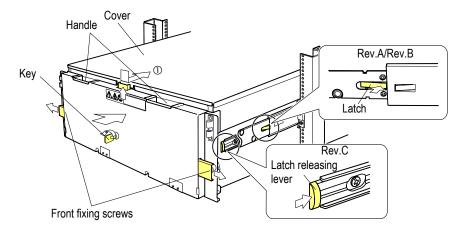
Removing Front Side of the "Chassis 3" (A Drive Box with the Last Unit ID#)
